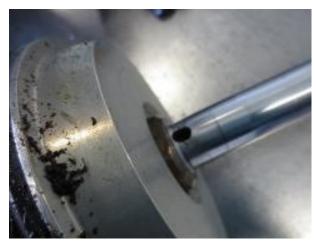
Close-up of the cylincer and piston shaft on the right propeller
